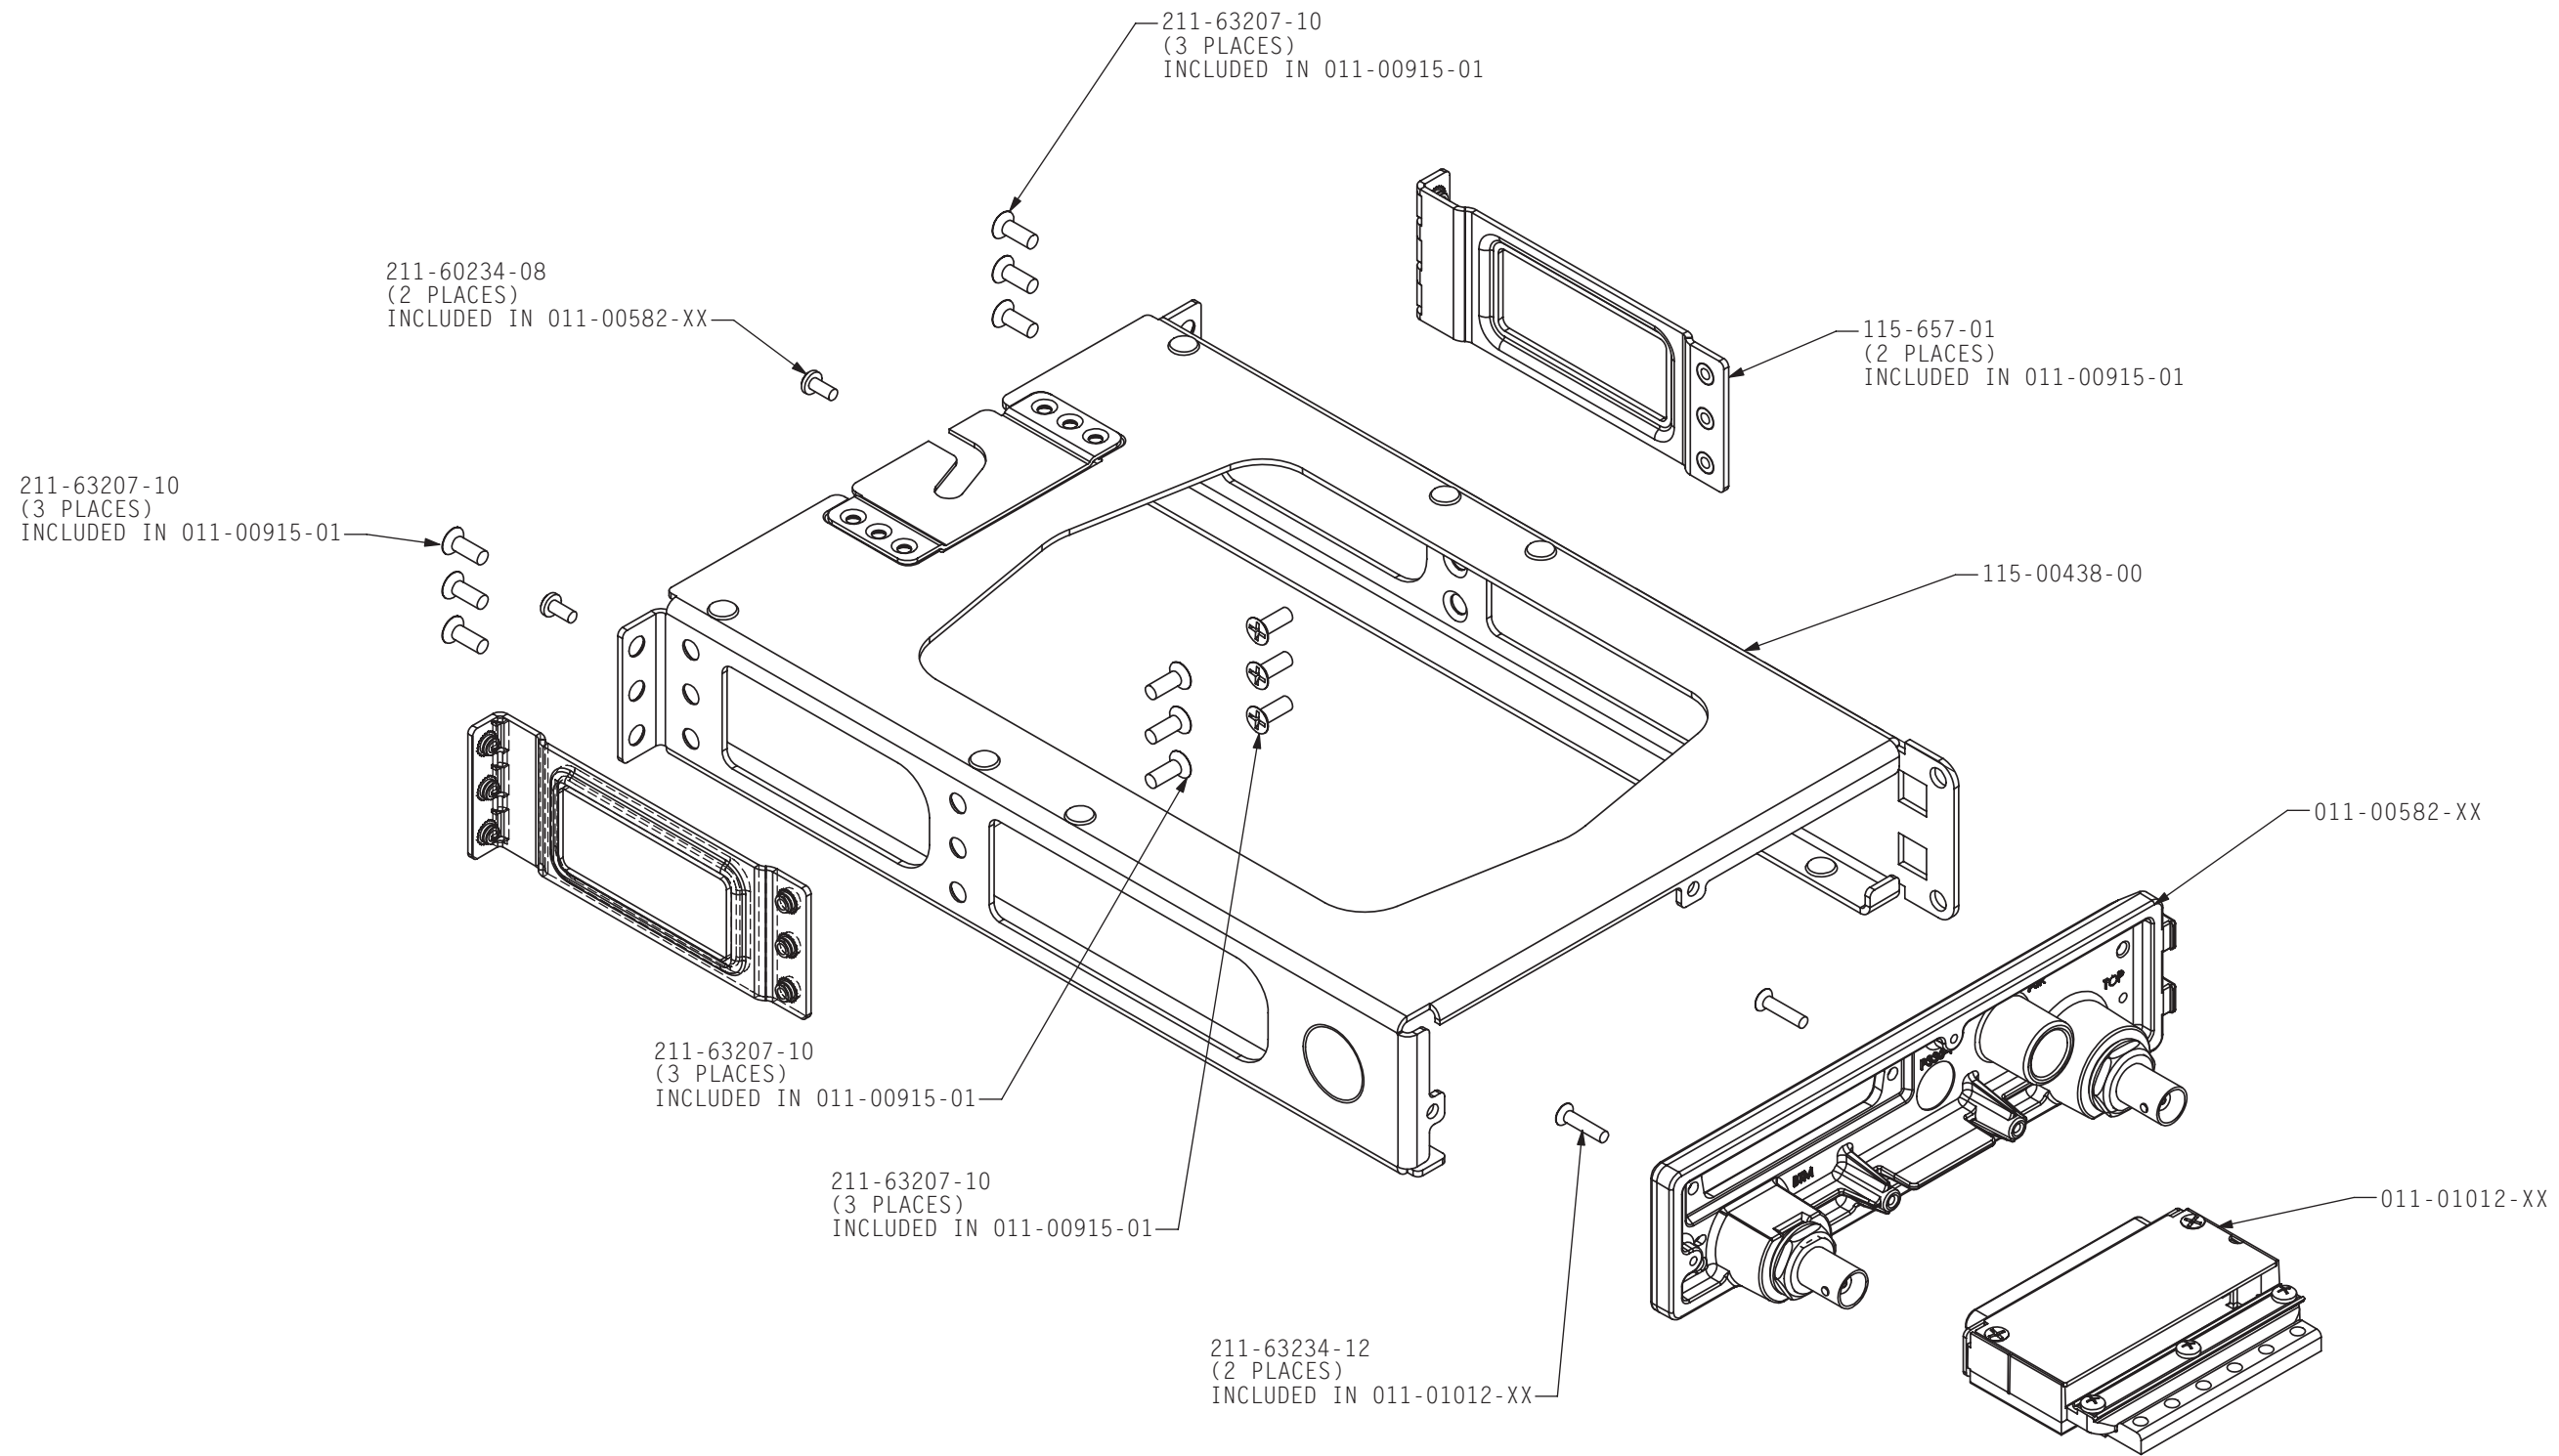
GTX 33 Connector/Rack Assembly Drawing
